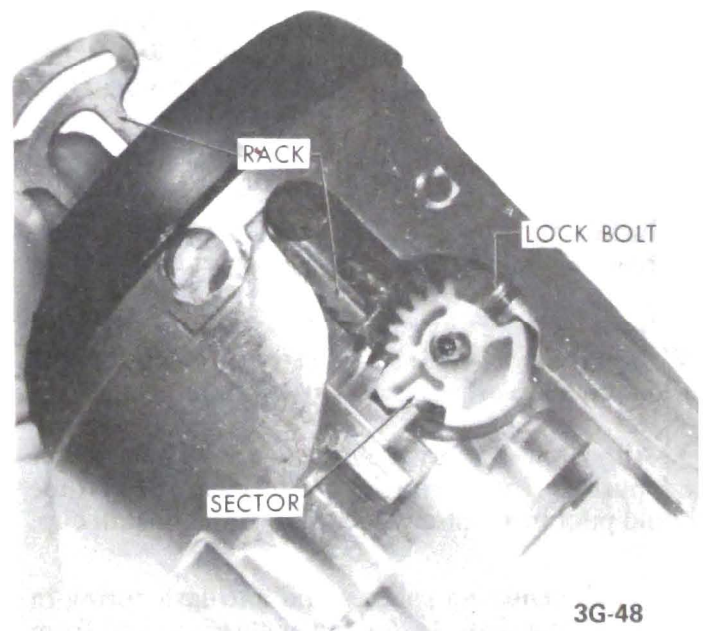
G-68 - Engaging Block Tooth on Rack to Sector
